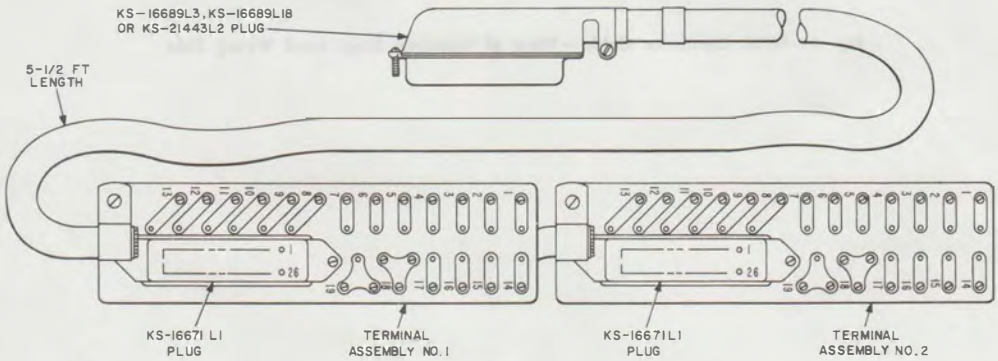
B25C Connector Cable—View of Terminal Strip, Local Wiring Side
